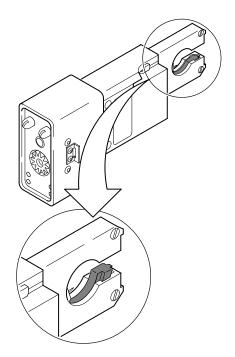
Inspect Exposed Surfaces of the Weld Head
